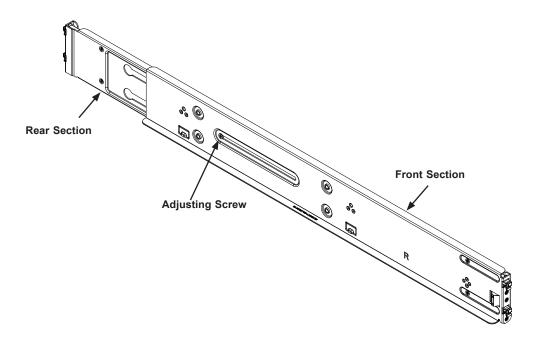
Rackmount Rail (Right rail assembly shown)
